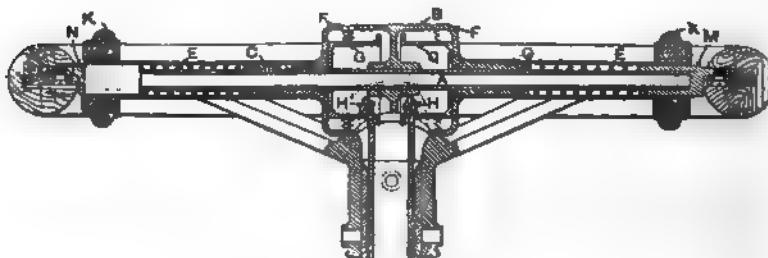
Steering Wheel and Attachments of the Panhard-Levassor Carriage. A, a shaft on a diameter of the wheel; B, a cylindrical fixed cap with toothed end; C, C, a sleeve with toothed ends, F, F, in normal engagement with B, under tension of spring; E, E, being prevented from rotating; G, G, drums on which wire cables, H, H, are secured and wound; K, K, knurled handles which may be grasped and pulled against the springs, allowing rotation of G, G. One cable, H, leads to carburettor link, the other to the spark adjuster.
